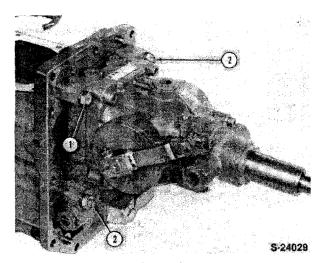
HST Transmission Unit Removal 1. Mounting Bolts (2) 2. Mounting Studs (2)
